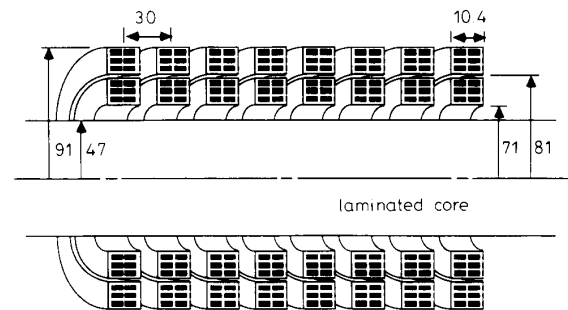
Test windings on the 25 kVA core (dimensions in mm)
